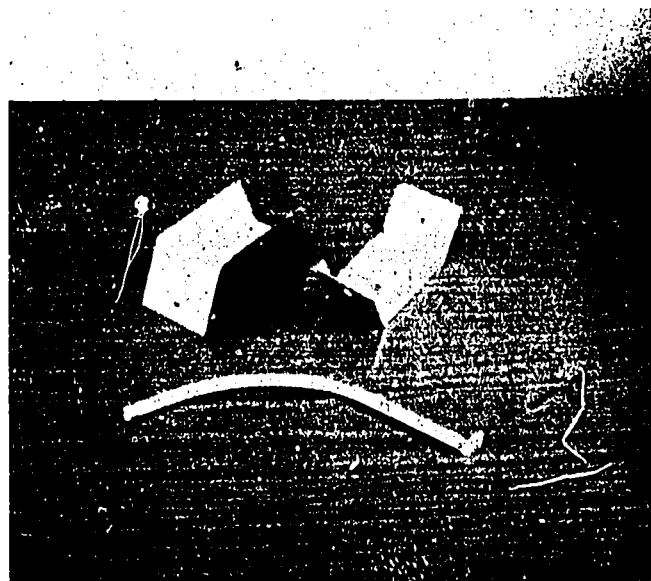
This desk lamp base is made from two sheet metal parts. All of the holes for fastening it together are already drilled in it. The stem is also shown.
